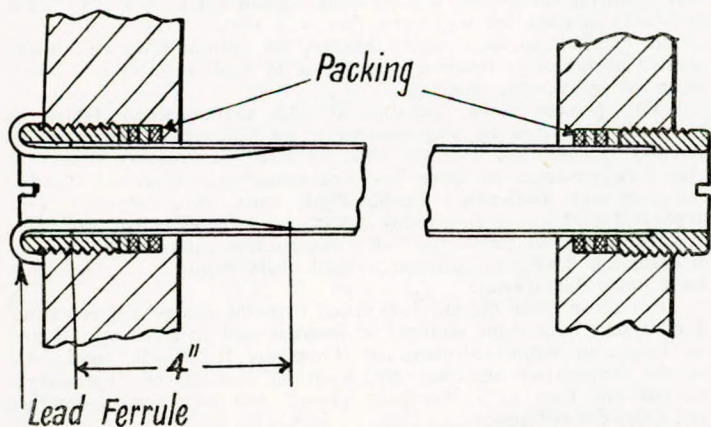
Lead sleeve as fitted to the "Empress of Scotland's" condenser tube inlet.
